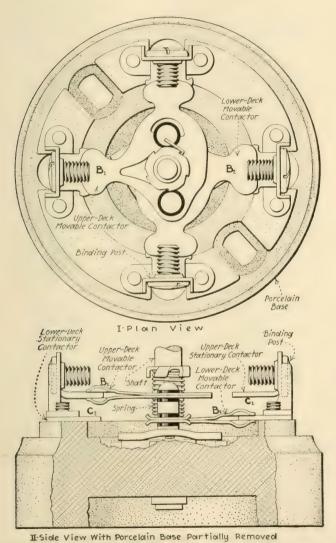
Showing construction of four-way, surface snap switch. (List No. 2183, Bryant Electric Co.)
